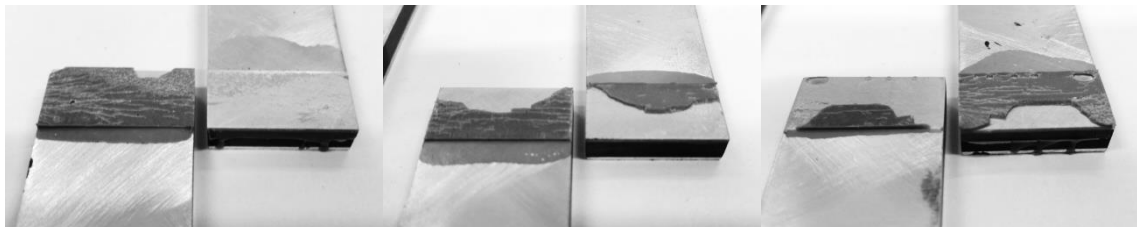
Failure surface of the single lap joints using AL-CFRP-AL-Type laminate (6.4 mm adherend thickness)
